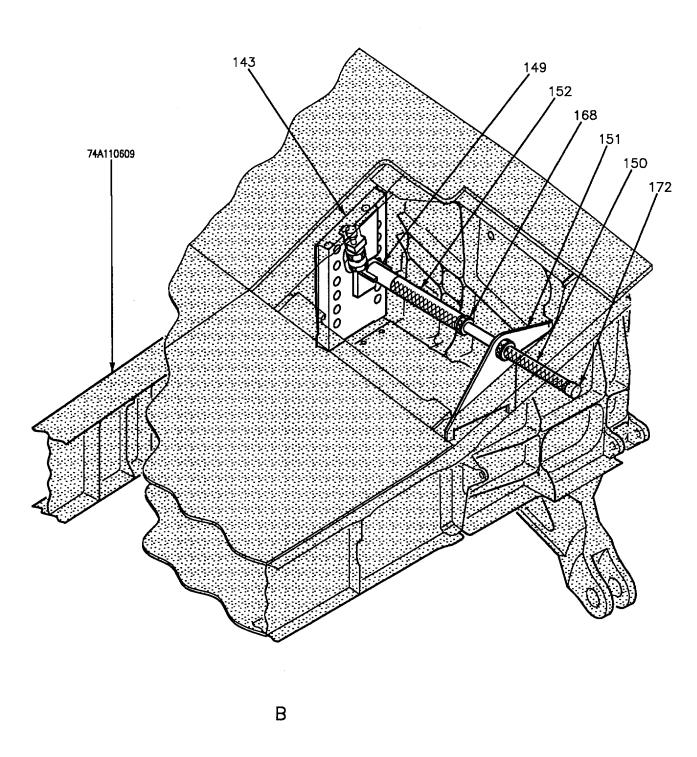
Installation of RE174110964 Locating Tool (Sheet 2)
